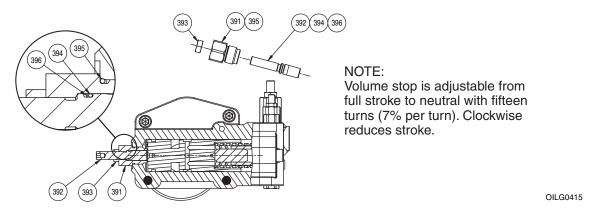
Exploded Parts Drawing for "P-1NN/F" Maximum Volume Stop, Series F1U Control
